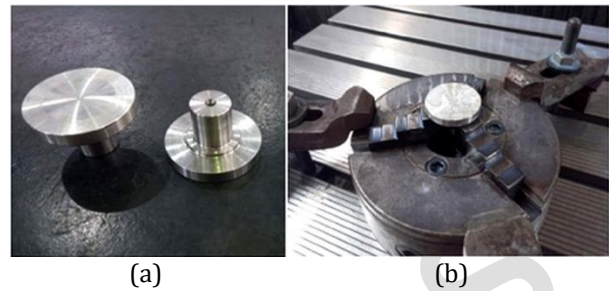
The milling workpieces (a) pre-machined workpiece has undergone initial turning (b) Clamping of pre-machined workpiece.
